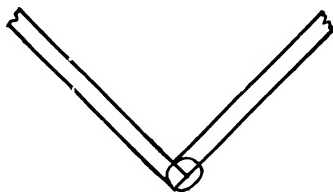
to 10.—Corner welds for various gauges.
